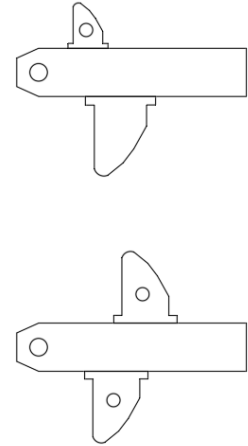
Optimum net gearbox torque using asymmetrical counterweight configuration
